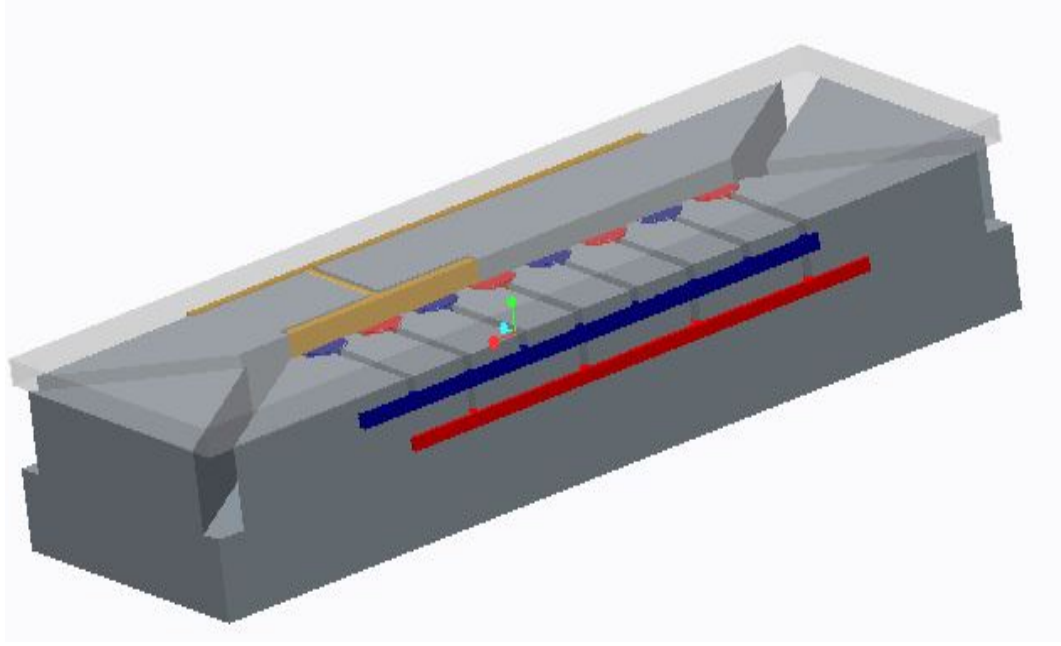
3D View: Microfluidic Cell Sorter Design Electrode Assembly.
